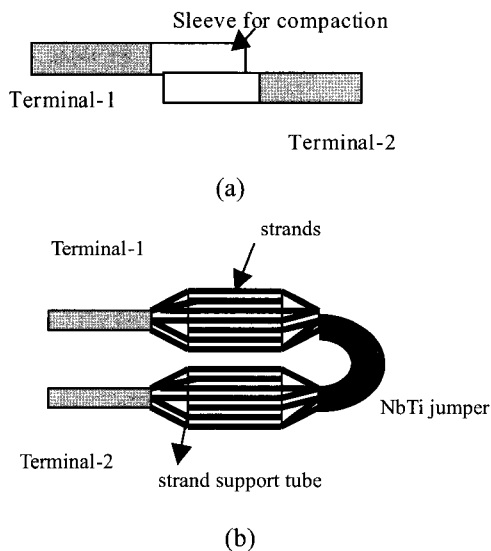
Schematic drawings (a) lap joint (b) two strand-to-strand joints for joining of Nb₃Sn cables.
